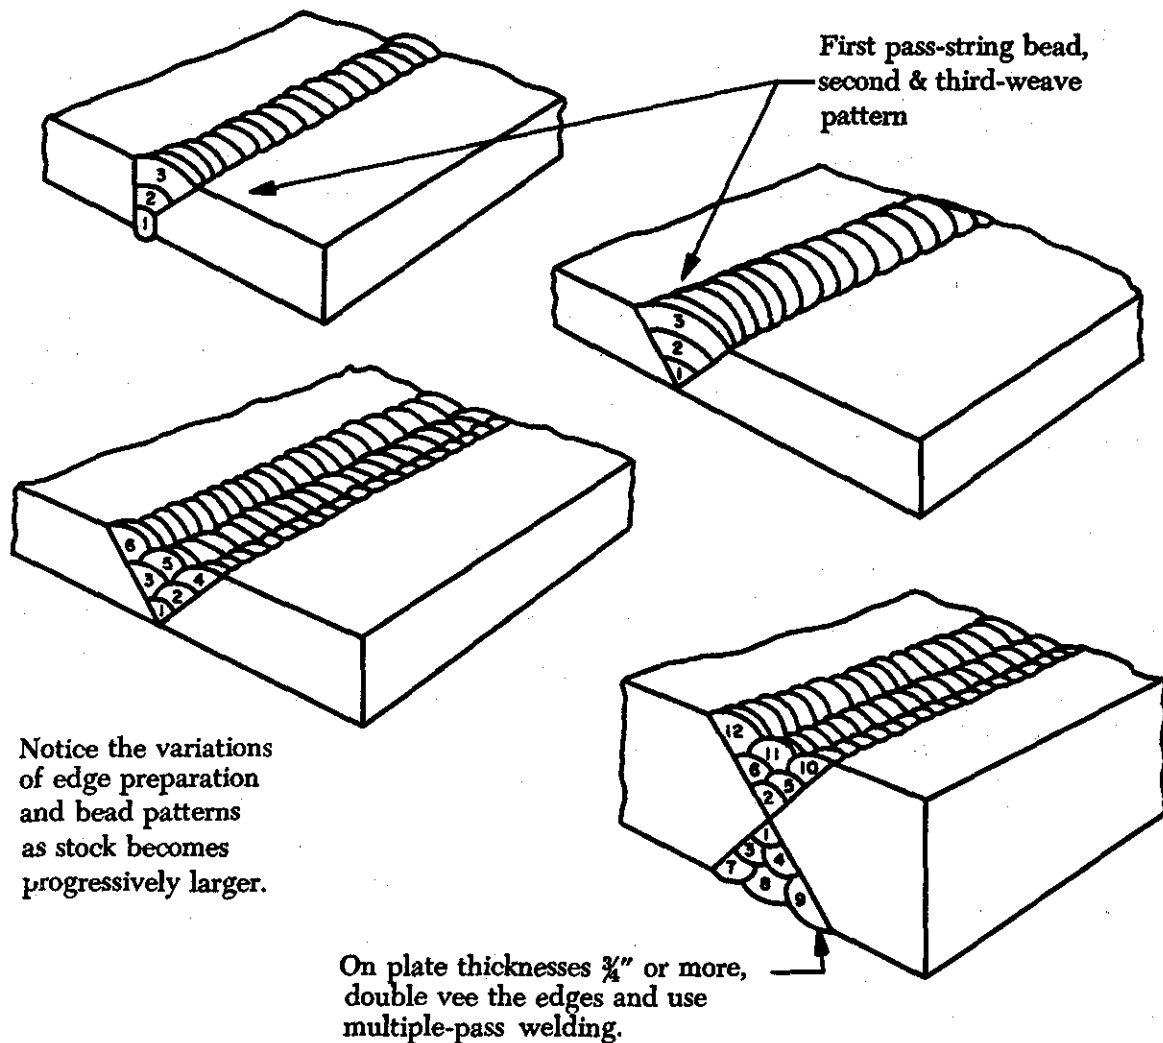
Multiple-pass groove welding of butt joints.
